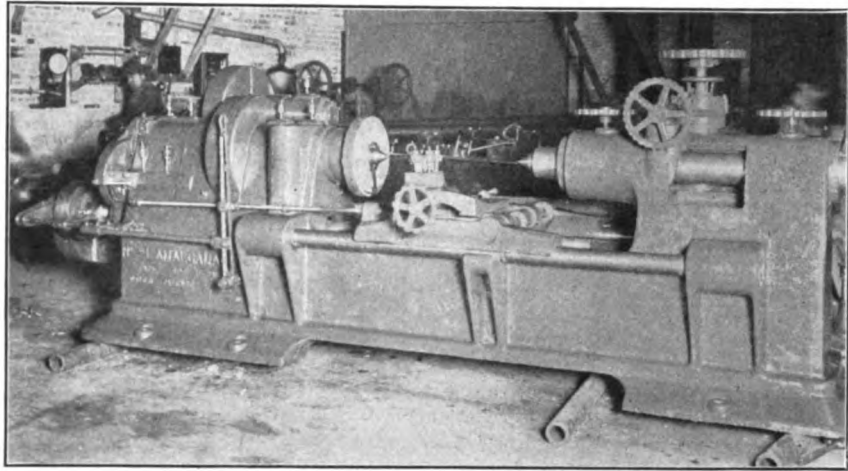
COMPLETED MACHINE ALL READY TO PAINT
